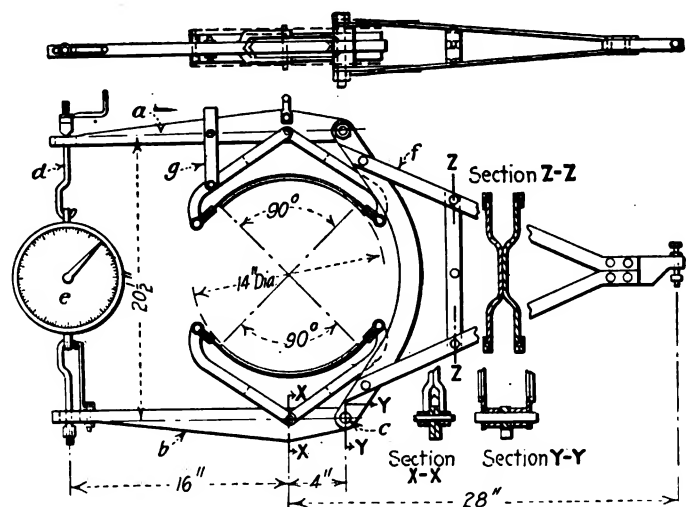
ASSEMBLY DRAWING OF BRAKE-LINING TEST MECHANISM
